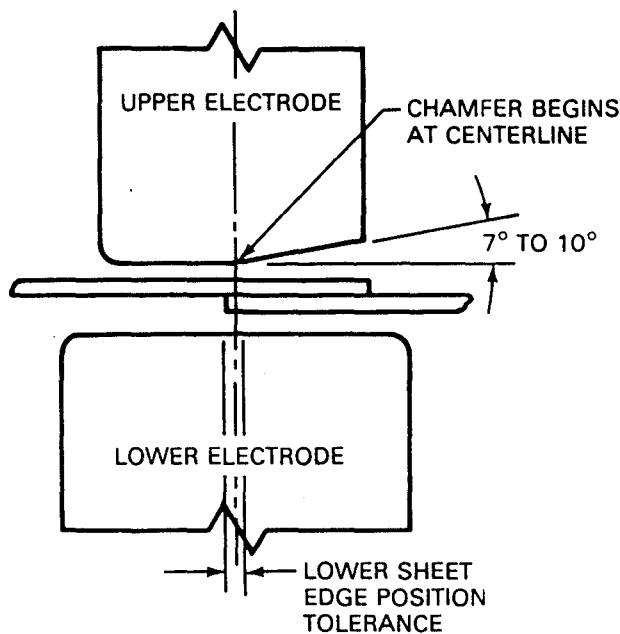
Electrode Face Contour and Joint Position for Metal Finish Seam Welding
